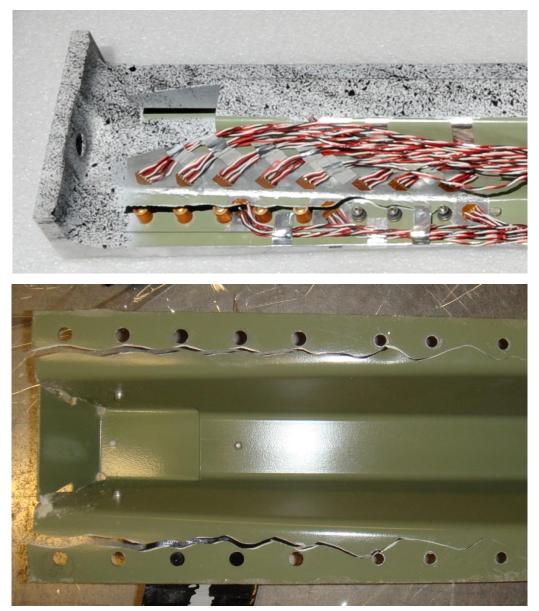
Similarity of failure between cracked stringer removed from ET-137 (bottom) and stringer bending test article after failure (top).
